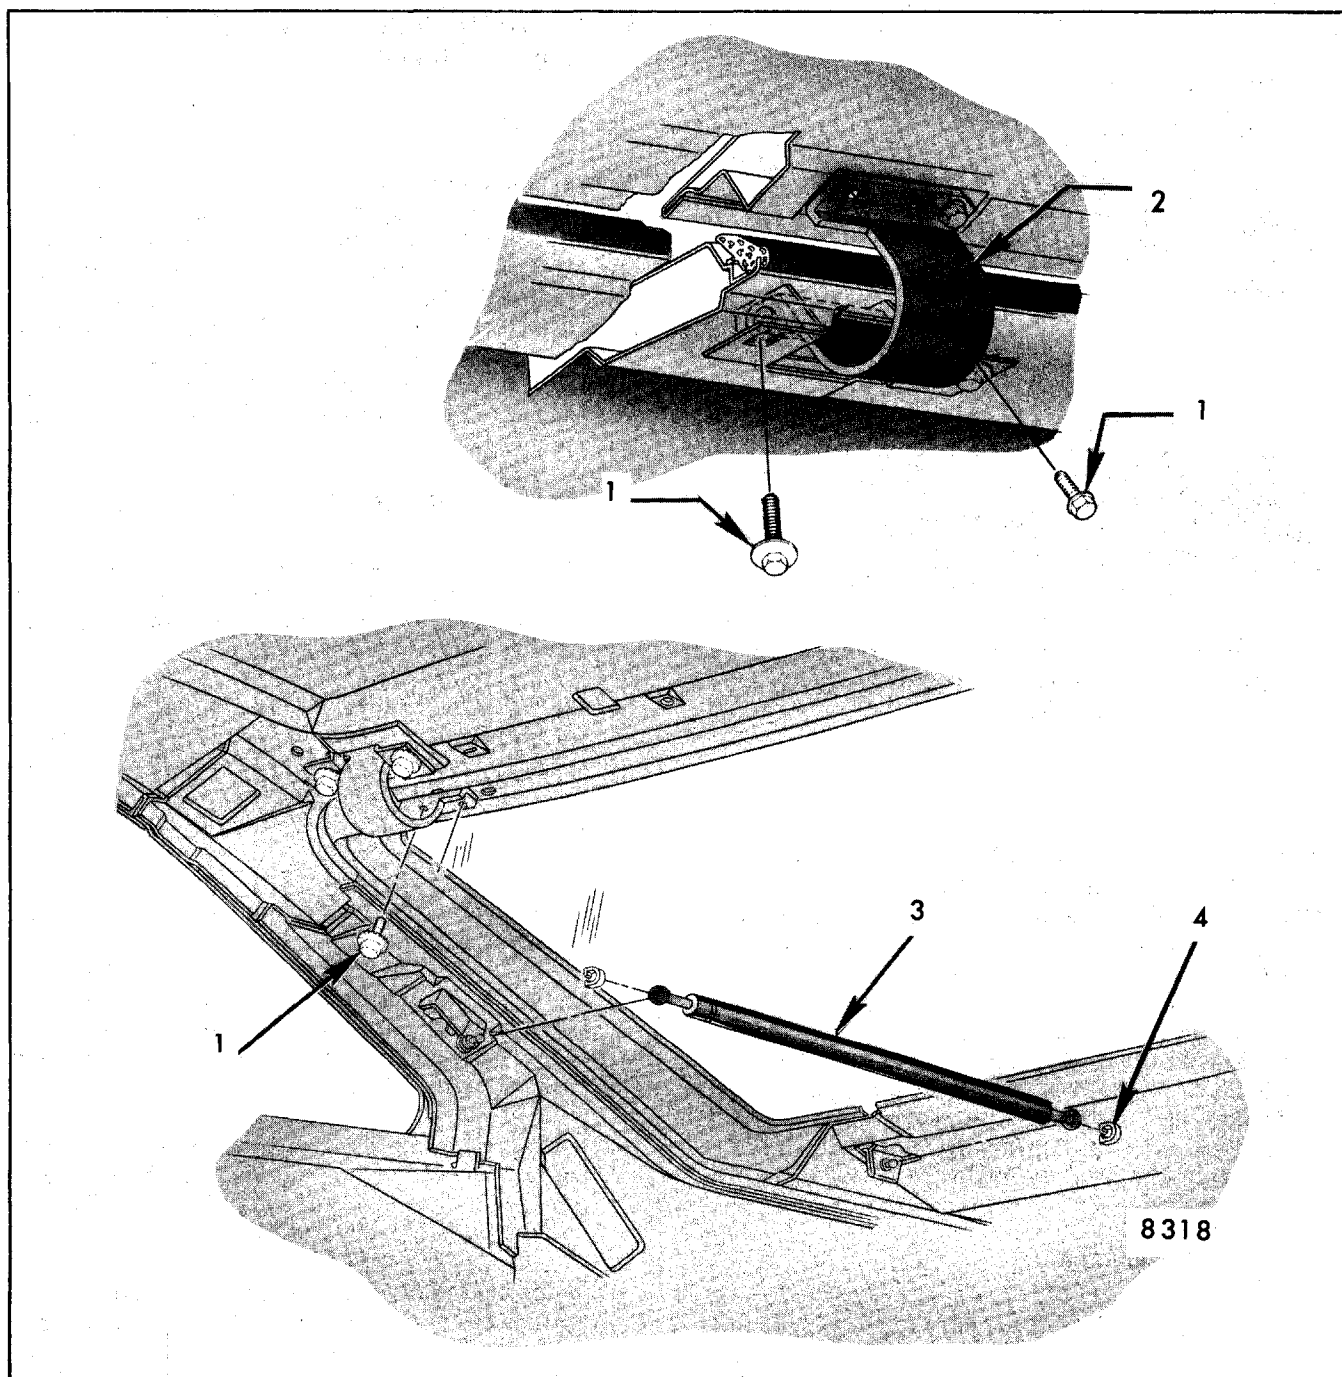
Hatchback Lid and Gas-Operated Support Assembly Attachments
